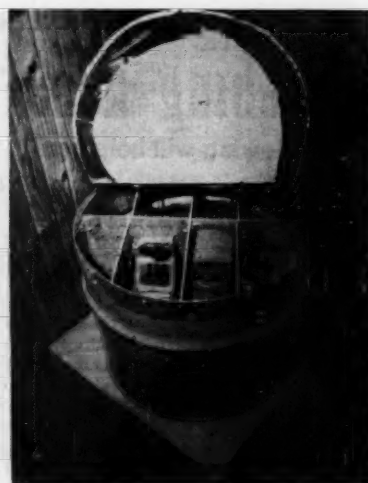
Welding rod container. The container shown here is neat, fairly simple to construct, and practically moisture proof and air tight. Since many vocational agriculture farm shops do not have satisfactory storage for welding rods, this container is being suggested.
